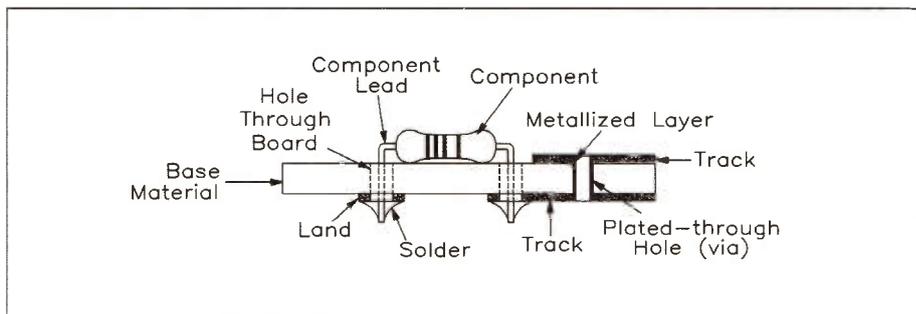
Cross-section of a double-sided, through-hole PCB, with a leaded component.
